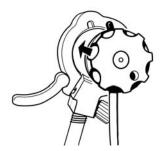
Removing the Transmitter from the Universal Attachment Arm
